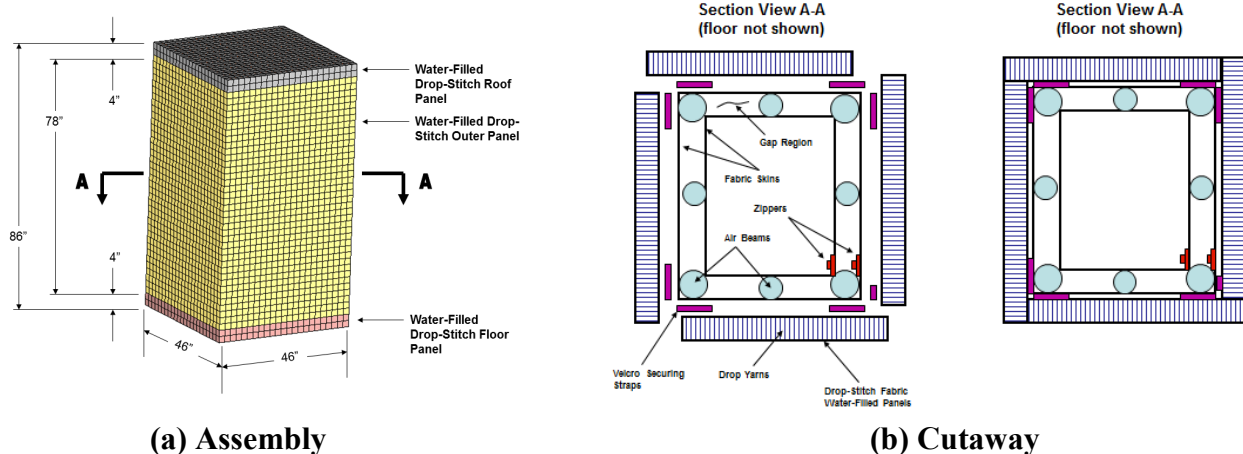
Rectangular Inflatable Crew Quarters Concept with Intermediate Air Cushioning Support, FEA Model and Section Views: (a) Assembly and (b) Cutaway with Component Details
